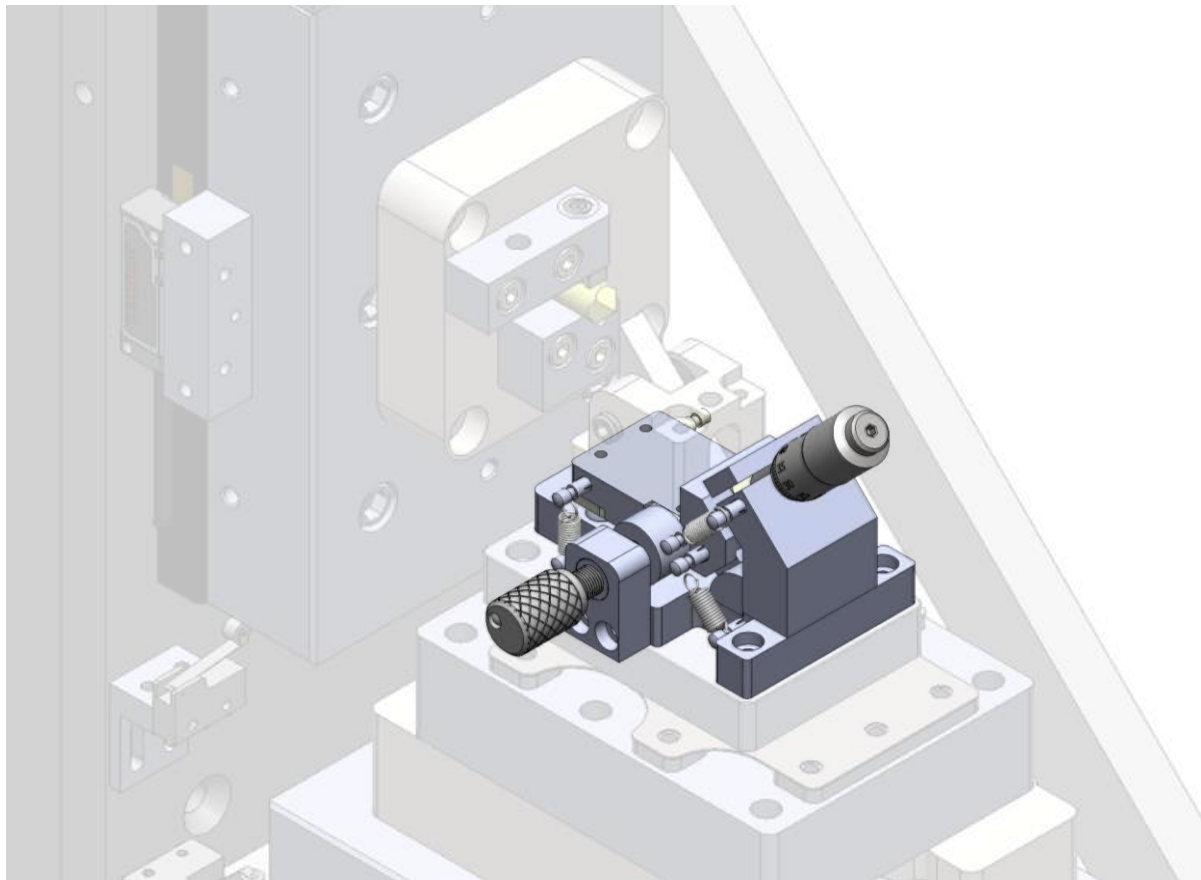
Goniometer and knife edge adjustment module, shown in full assembly
